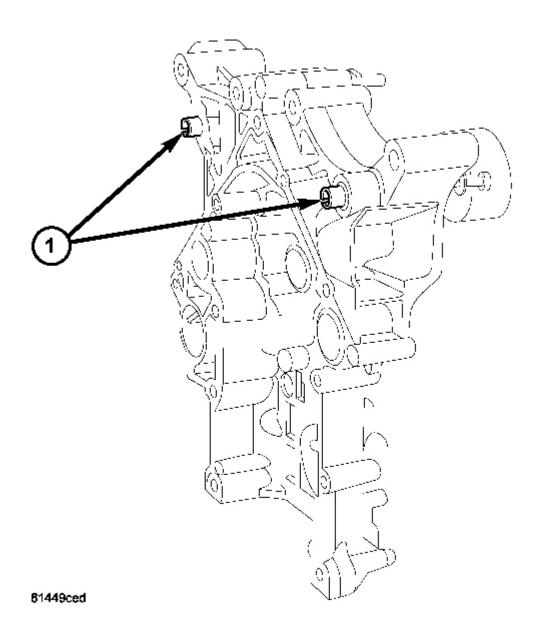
Front Cover Slide Bushings Courtesy of CHRYSLER LLC
